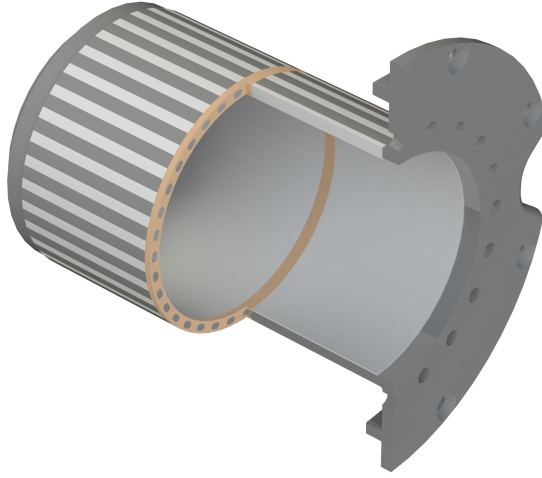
Segment ring where a section is cut out to show the glass fiber ring that is inserted.
